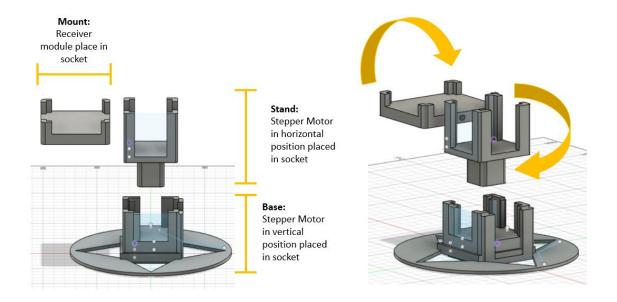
Tracking System CAD Design Rendered using Fusion360
